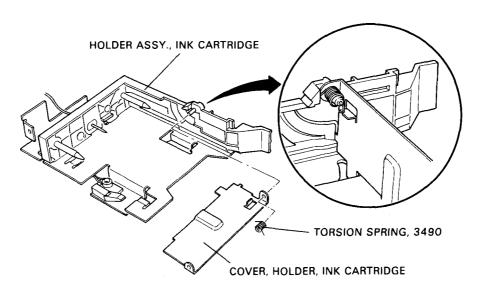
Assembling TORSION SPRING, 3490 and COVER, HOLDER, INK CARTRIDGE
